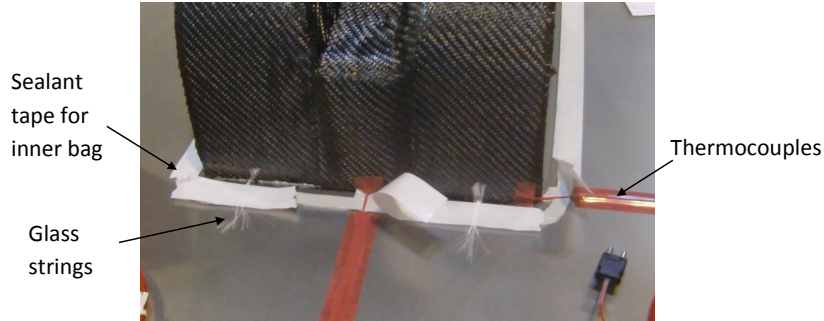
Thermocouples (T_c), glass fiber strings and sealant tape for inner bag on the C-shape mould
